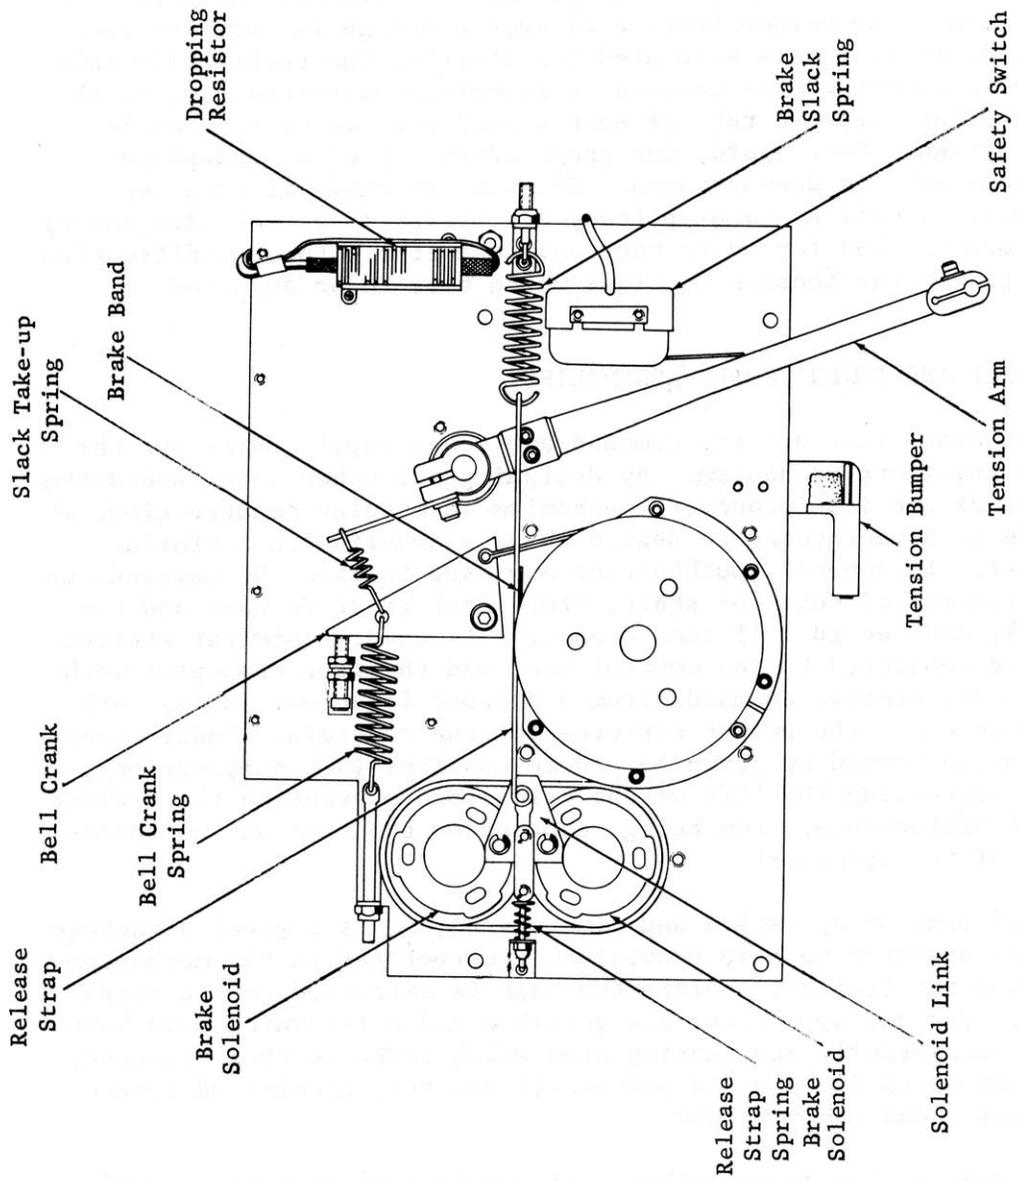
Typical Reel Assembly With Mechanical Servo Tension Control
